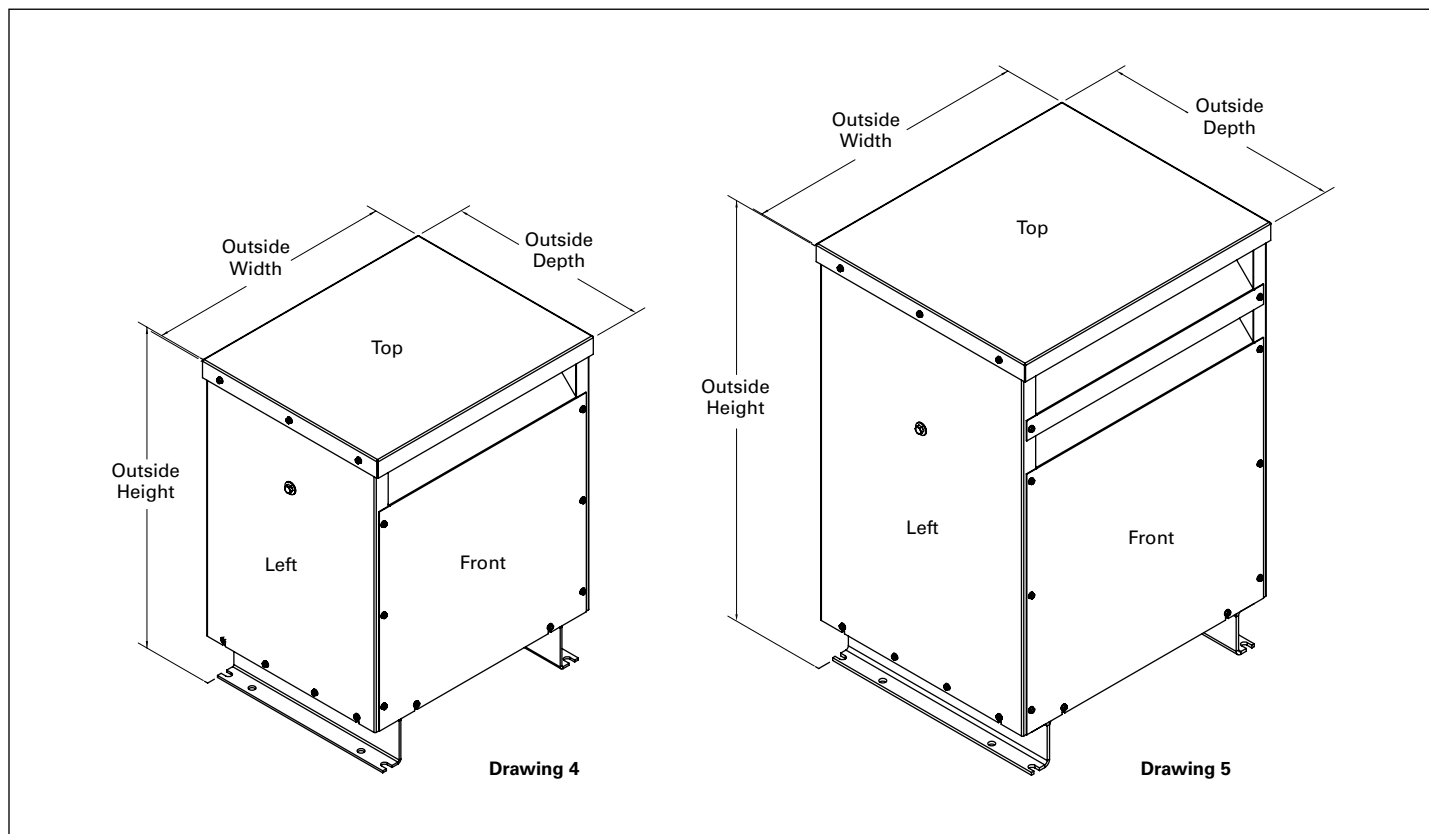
Enclosure Dimensional Drawings—Ventilated Transformers
